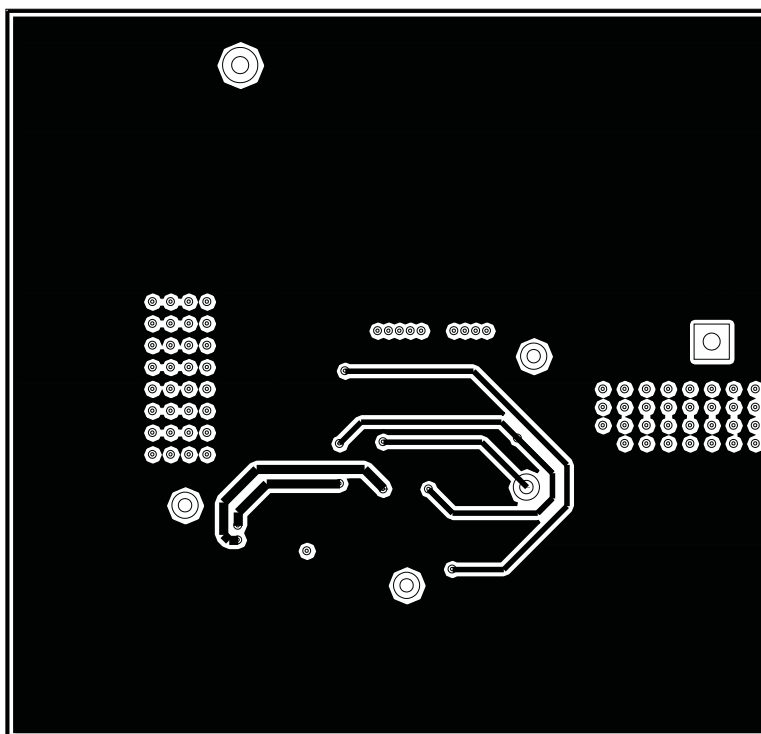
Bottom Layer Assembly Drawing (bottom view)
